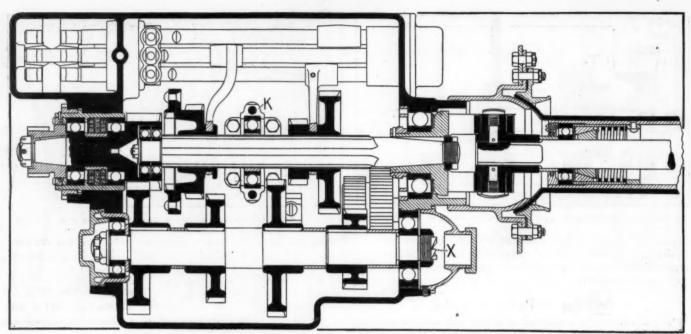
Section of the gearset of the type 72 Lozier, showing center bearing for the mainshaft
